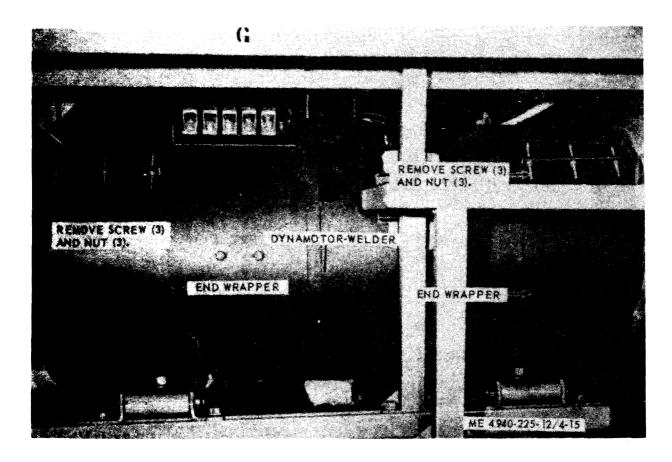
Dynamotor-welder end wrappers, removal and installation.
